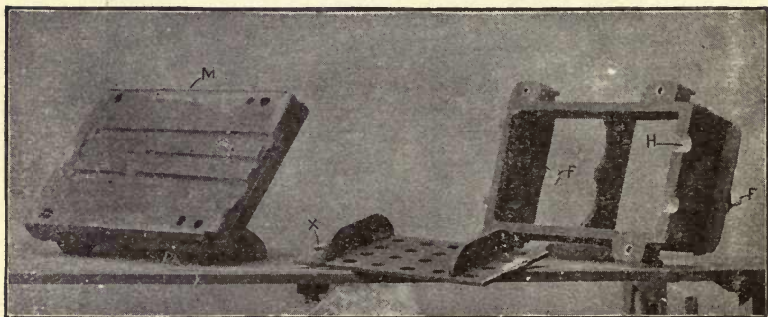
MOULD BOARD, BOTTOM PLATE AND COPE HALF OF FLASK.
